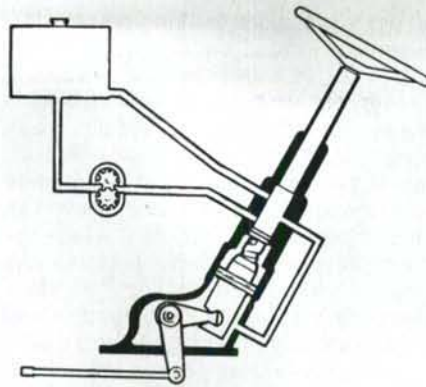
Schematic view of late power steering gear unit used on some 5100 models and all others except 5200, 6600C, 7600C, 6700, 6710, 7700 and 7710. Steering cylinder is built on ball nut and gear unit is pressurized. Refer to Fig. 9 for exploded view.
